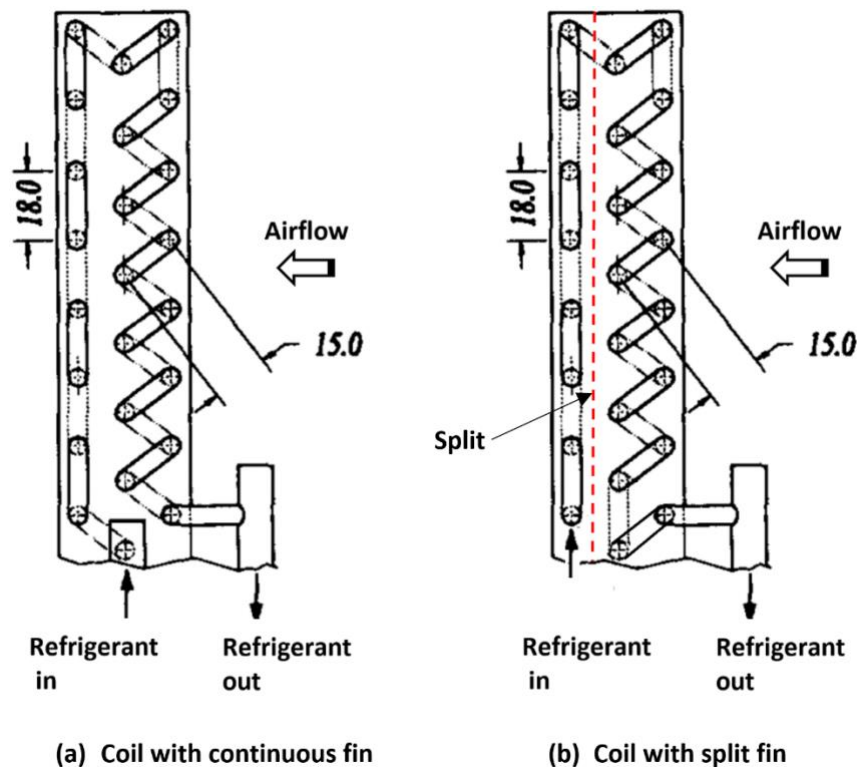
Tube configuration and refrigerant flow in one (upper) of three equal circuits in a gas-cooler prototype (side view).Dimensions in mm.
